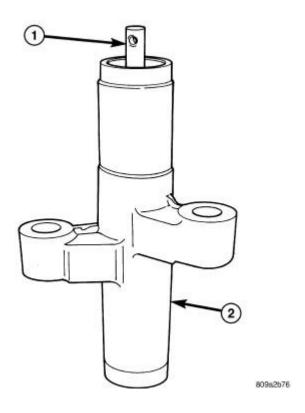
TIMING BELT TENSIONER Courtesy of CHRYSLER LLC
